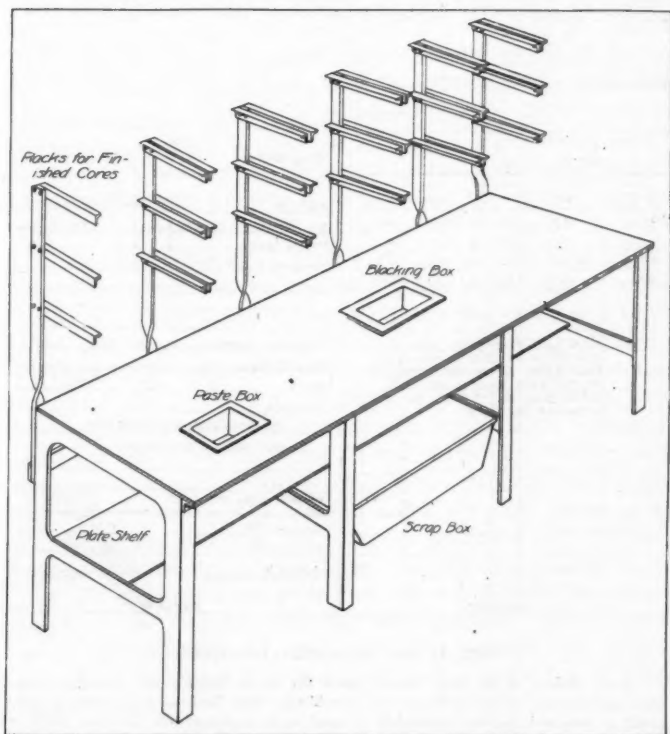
LAYOUT OF A PASTING AND ASSEMBLY BENCH FOR SMALL CORES SHOWN IN FIG. 9.
